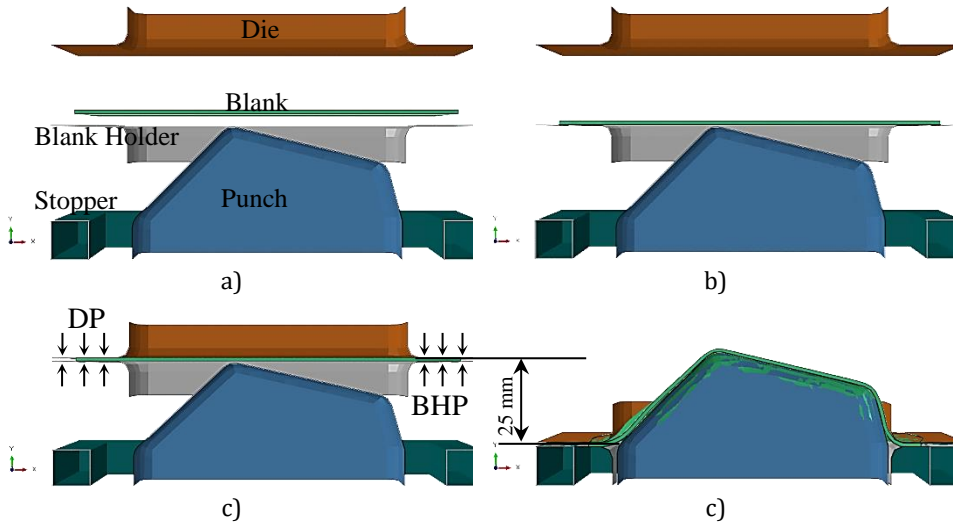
Deep drawing manufacturing range; a) Initial position, b) Blank set-up, c) Die action and application of BHP and d) Final position after 25 mm stroke
